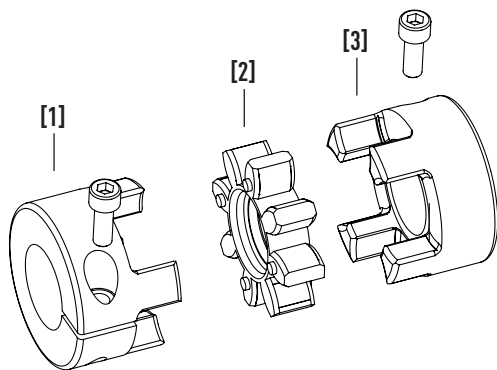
Coupling assembly variant 1: clamping hubs with one clamping screw
